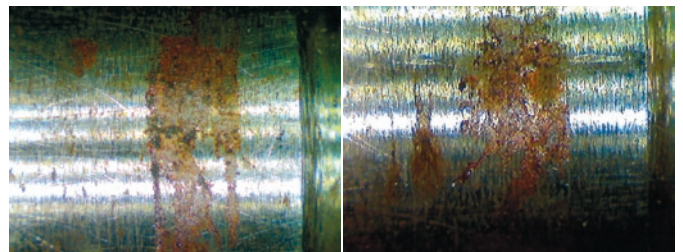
Base sample after fretting wear, magnified about 15x. Lack of machining strengthening the surfaces. Visible traces of fretting wear [6]
